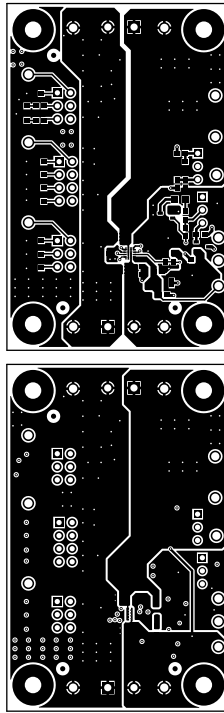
TPS25946EVM Board (a) Top Layer (b) Bottom Layer
